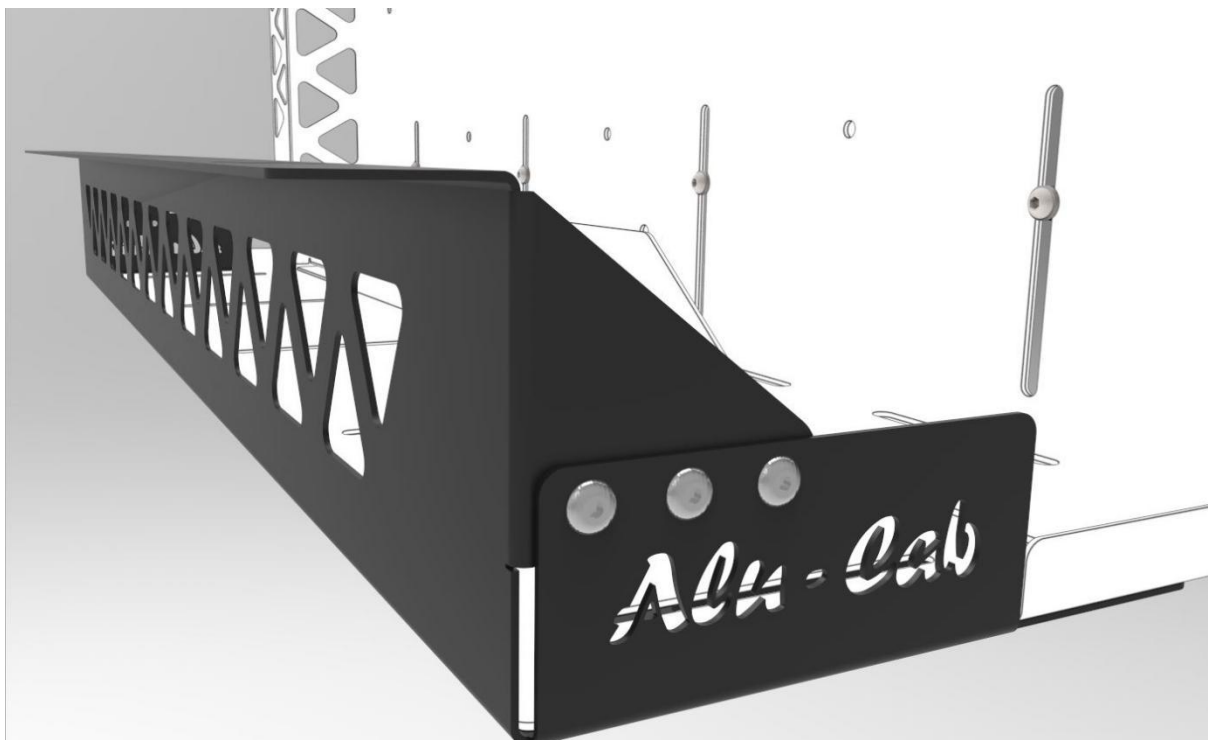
Rivet 3 Rivets into the corresponding laser cut holes on the side gussets of the Shelf Mount Bracket, on both sides
